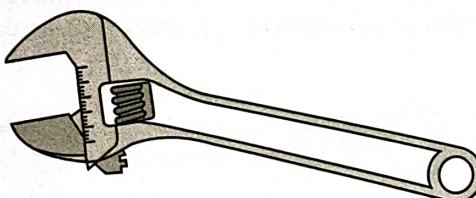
(g) Adjustable spanner or Adjustable wrench.
